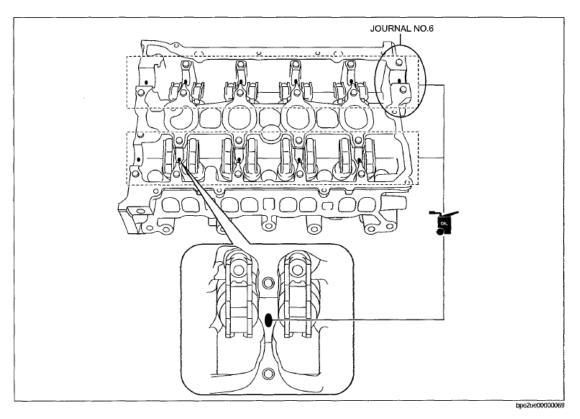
Identifying Gear Oil Applying Areas To Center Area Of Cylinder Head Journal
